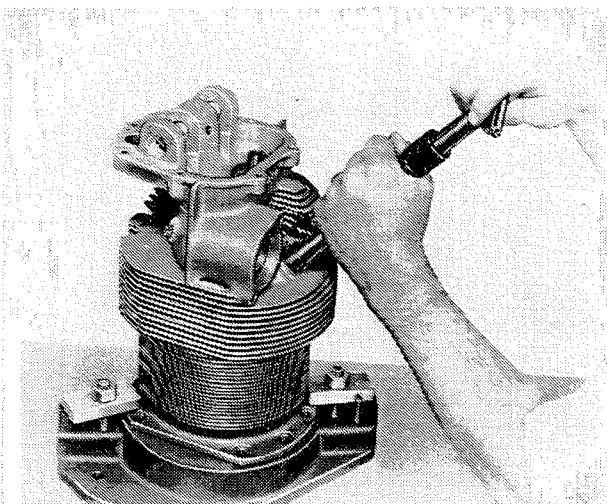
B. EXPANDING SPARK PLUG HOLE HELICAL COIL INSERT
